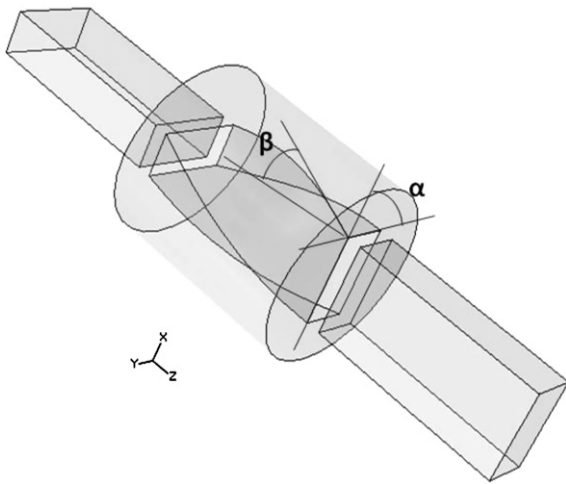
Schematic of workpiece during the twist extrusion processing.
